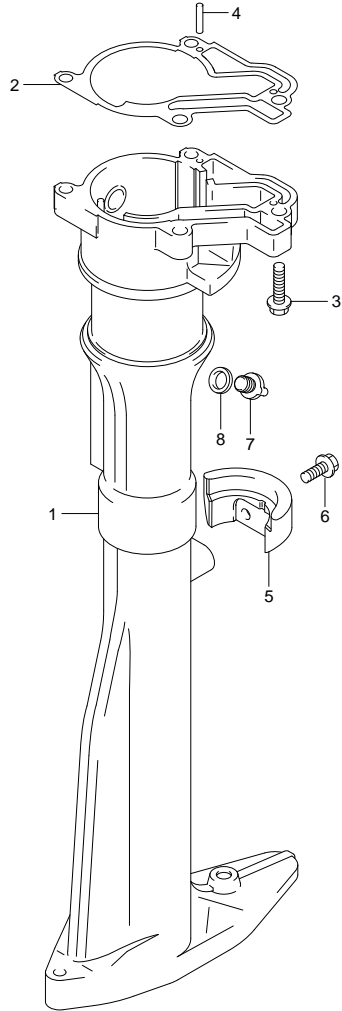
(1-C-2) DRIVE SHAFT HOUSING
